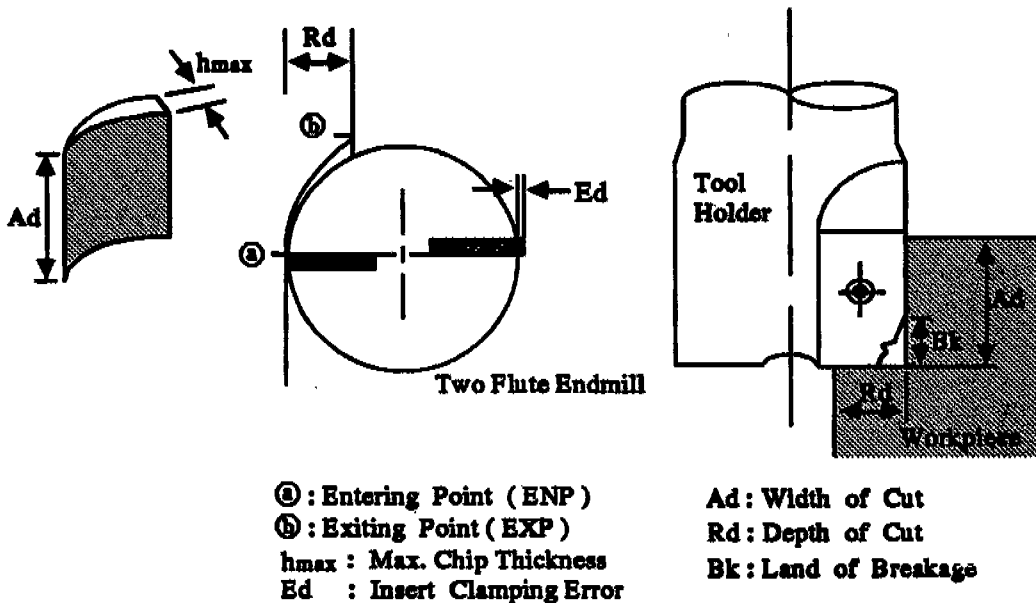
Geometry of the Tool and Ideal Chip Generation Mechanism
